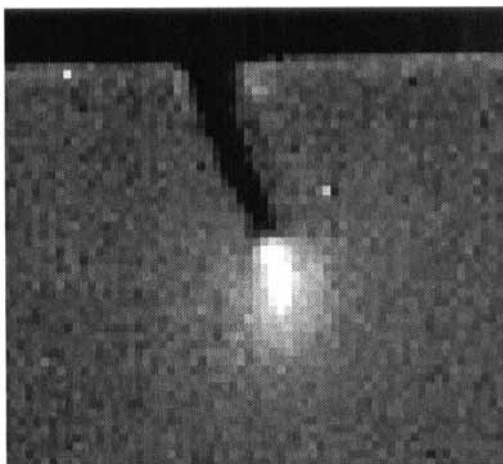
One frame from a sequence of IR video images of a 0.7 mm-long fatigue crack in a 3 mm-thick aluminum alloy test bar. The saw-cut used to initiate the crack appears as a slanted dark slot at the top of the image (edge of the bar).
